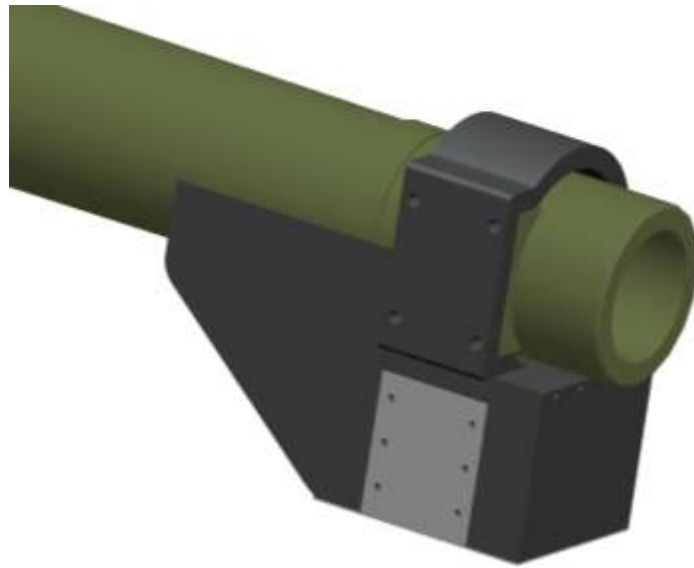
Solid TVA design assembled to the gun Barrel with casing.
